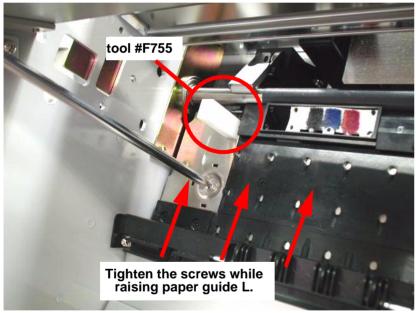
Paper Guide L Assembly Position Adjustment (1/2)
